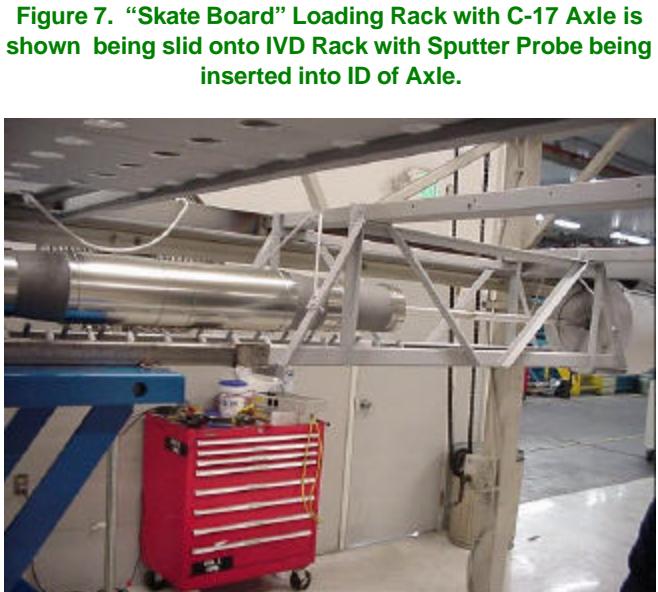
“Skate Board” Loading Rack with C-17 Axe is shown being slid onto IVD Rack with Sputter Probe being inserted into ID of Axe.
